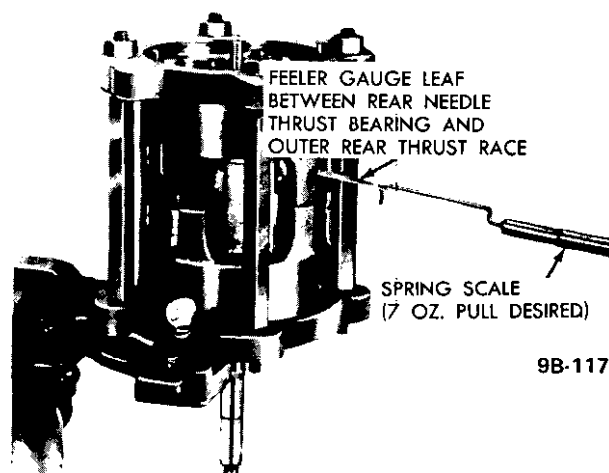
B-145 Checking Drag on Selected Feeler Gage Leaf with Spring Scale
